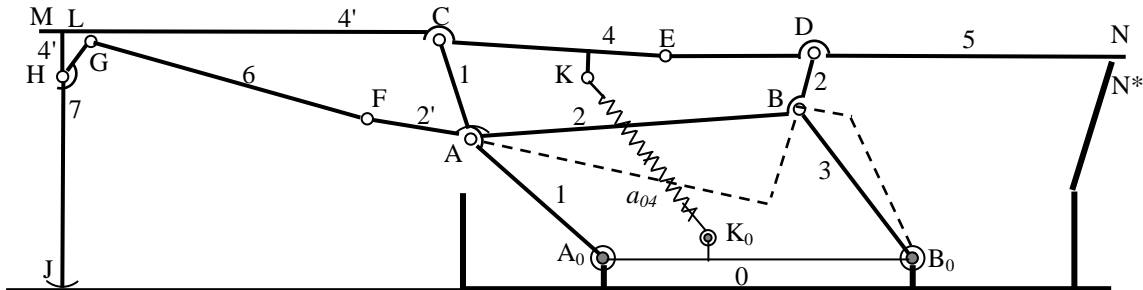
Kinematic scheme of the coach mechanism in unfolded position (bed configuration)
